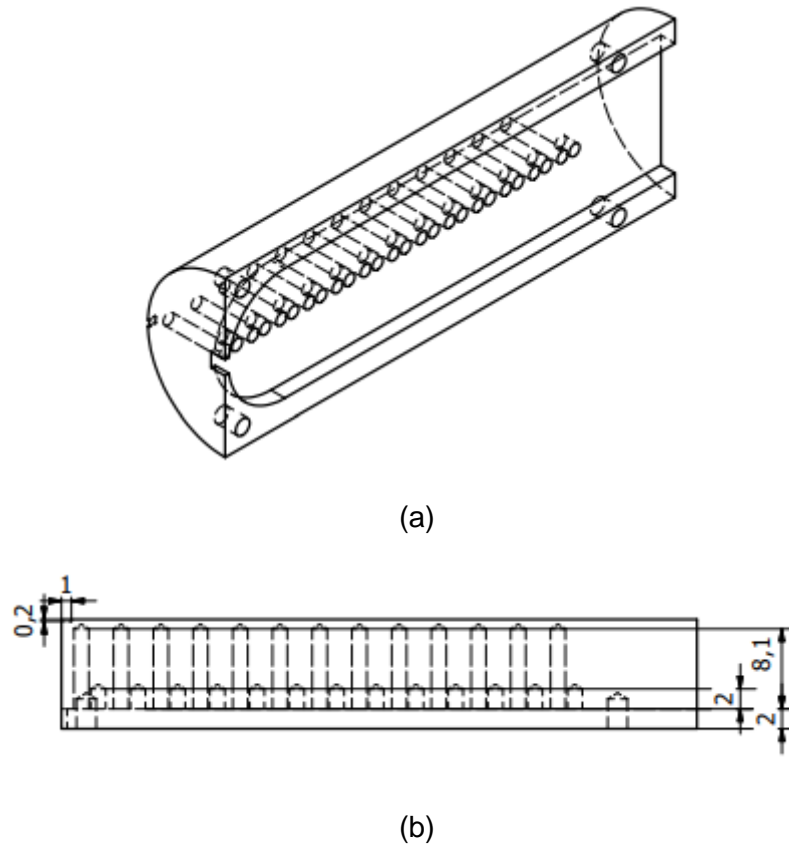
Schematic sketch of the pin where 26 thermocouples are installed: (a) in 3D; (b) in 2D with the corresponding dimensions.
